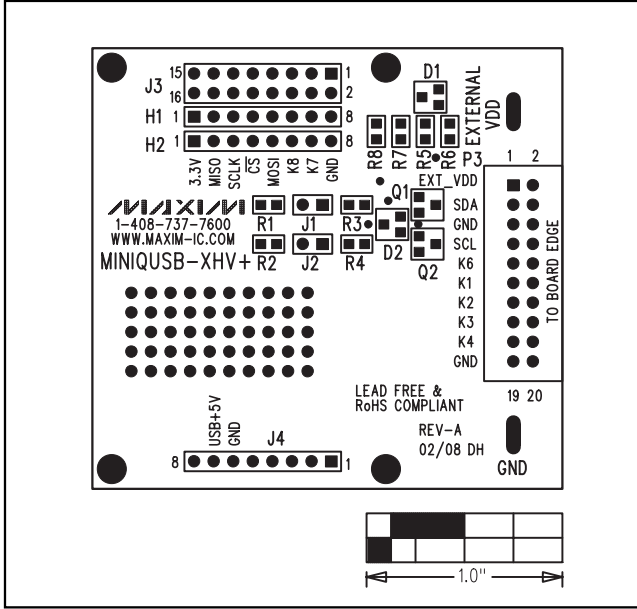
MINIUSB-XHV Expander Board Component Placement Guide—Component Side
